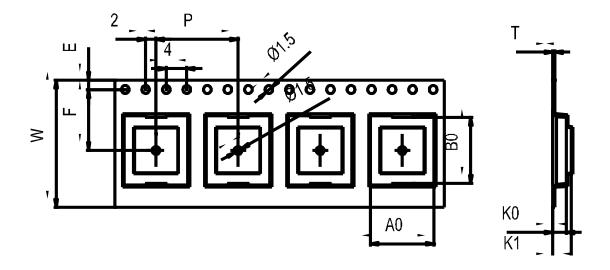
Carrier Tape Dimension Drawing (Unit: mm)
